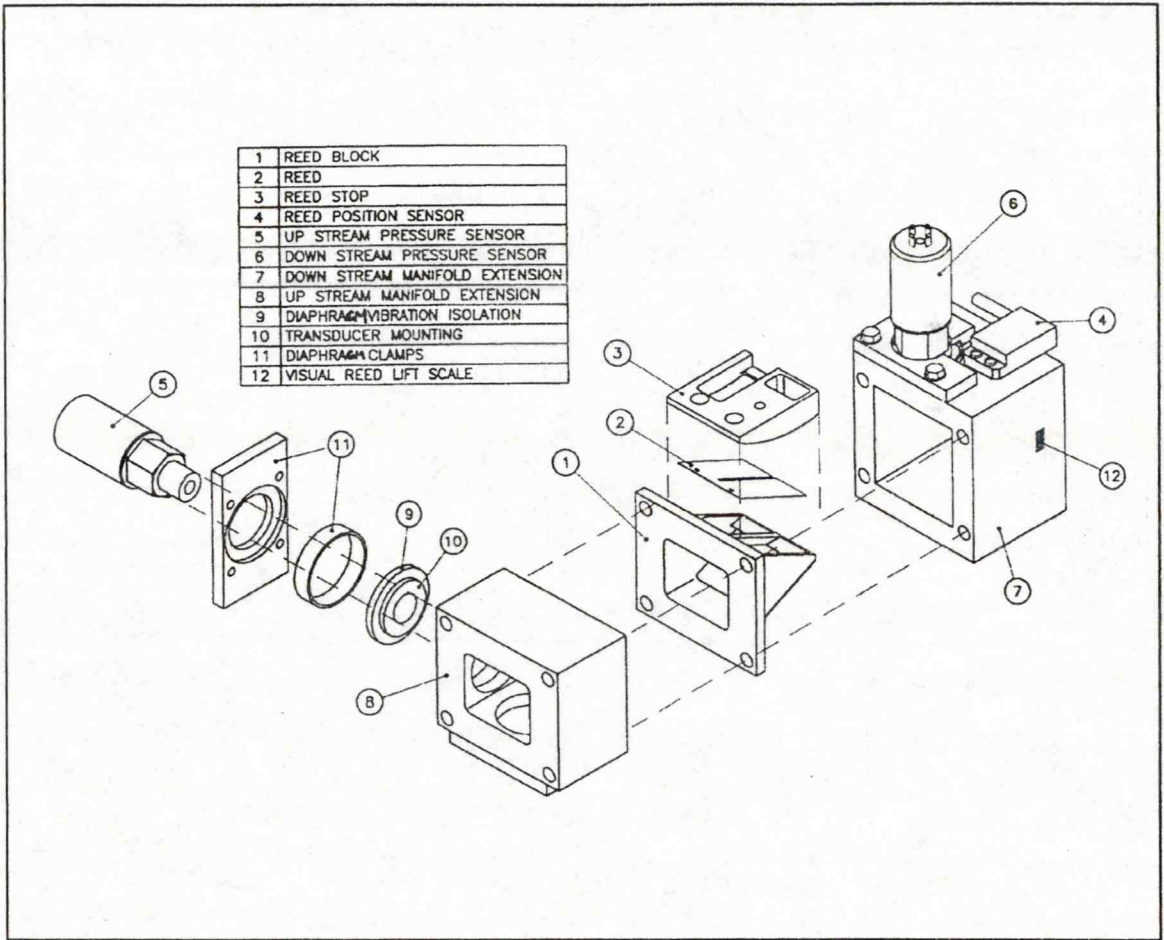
Exploded assembly of manifold extensions showing the position of the sensors and the detail of the flexible mountings.
